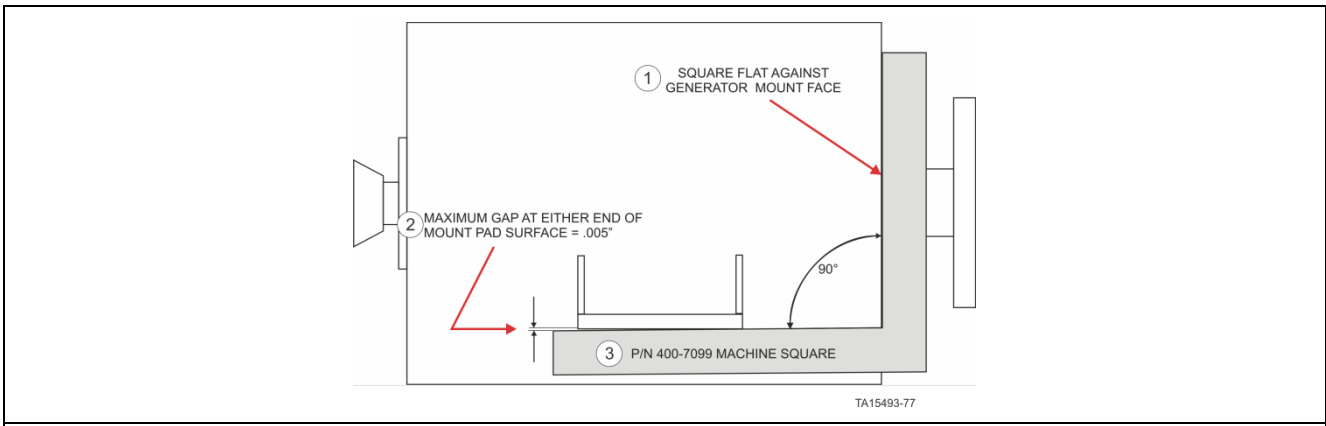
Check perpendicular alignment of mount feet and stator adapter - (1 of 2)
